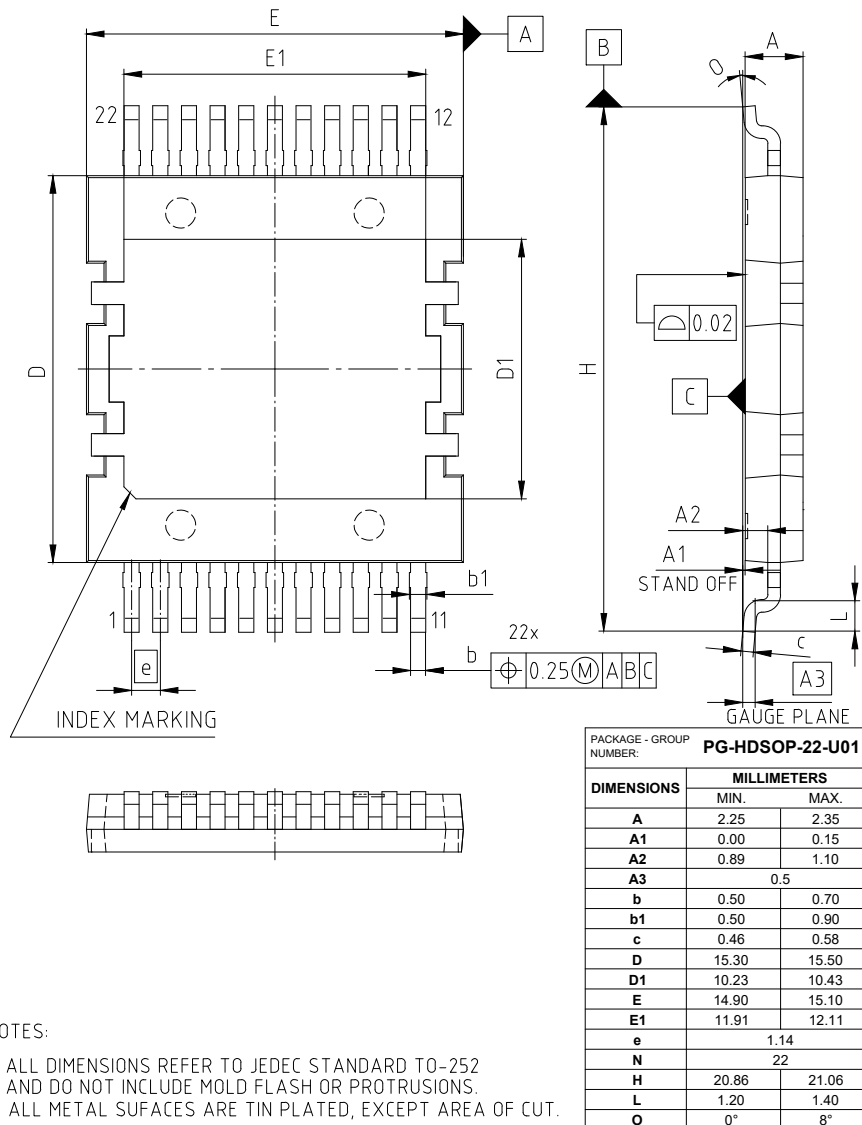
Outline PG-HDSOP-22, dimensions in mm
